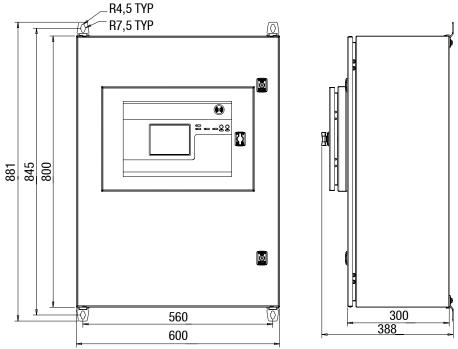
Touchpoint Pro Medium Wall Mounted Enclosure - Mild Steel
